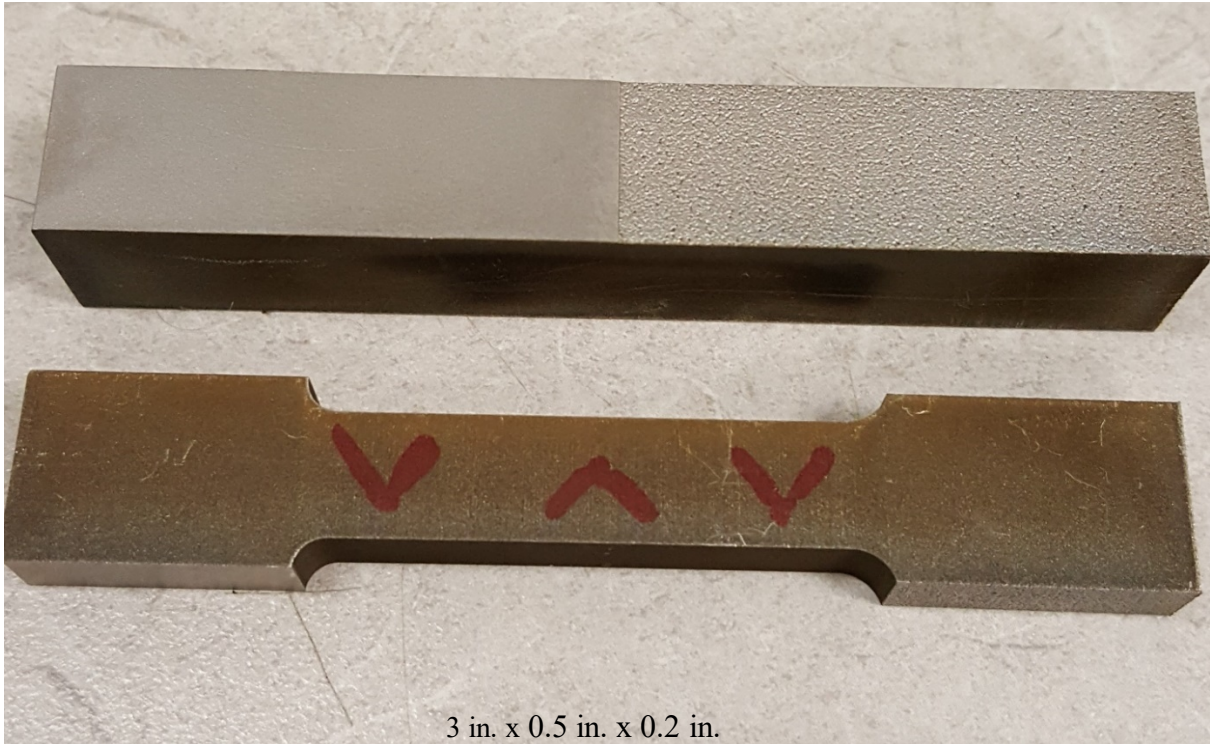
Hybrid SS316L Tensile Test Specimen
